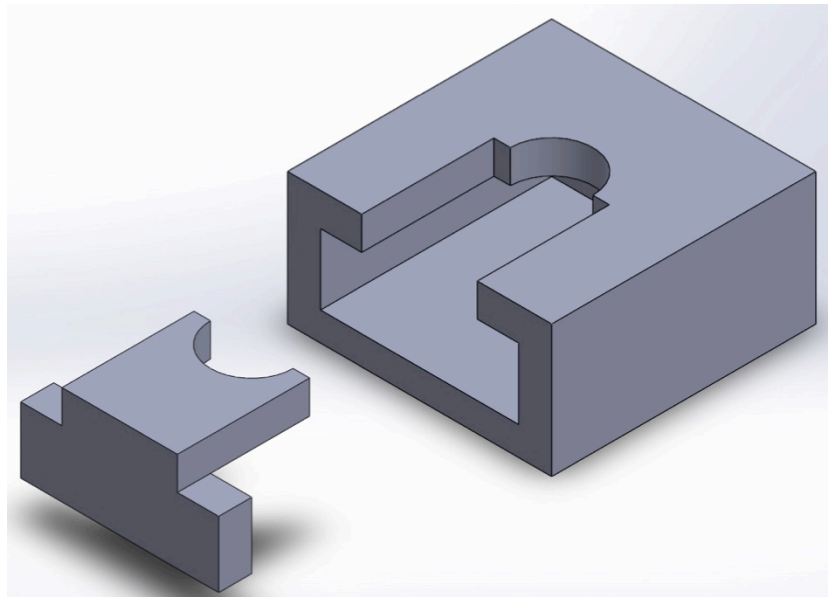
First Ransom & Randolph fixture redesign. The grip modified from ASTM standard D897. This preliminary design was meant to impart even loads on the sample, while remaining easily machineable.
